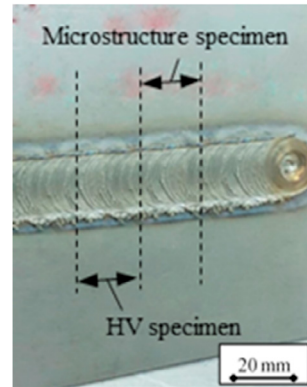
Test carried out with 800 rpm and 200 mm/min.
